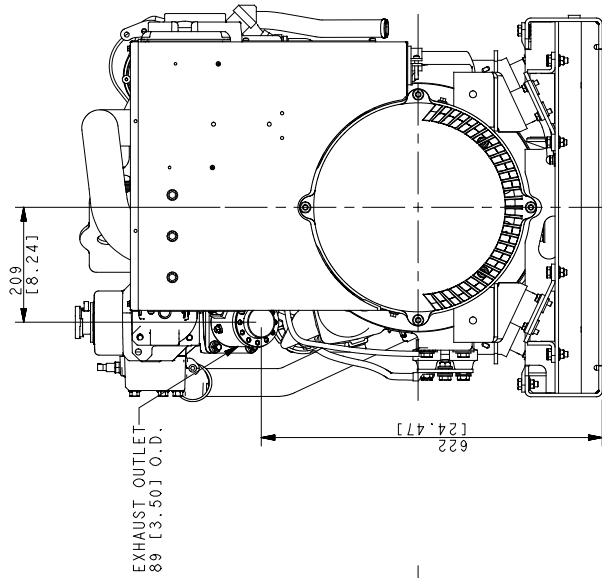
Dimension Drawing, 40EOZD(C)J & 33EFOZD(C)J (Open Unit Sheet 1 of 2)
